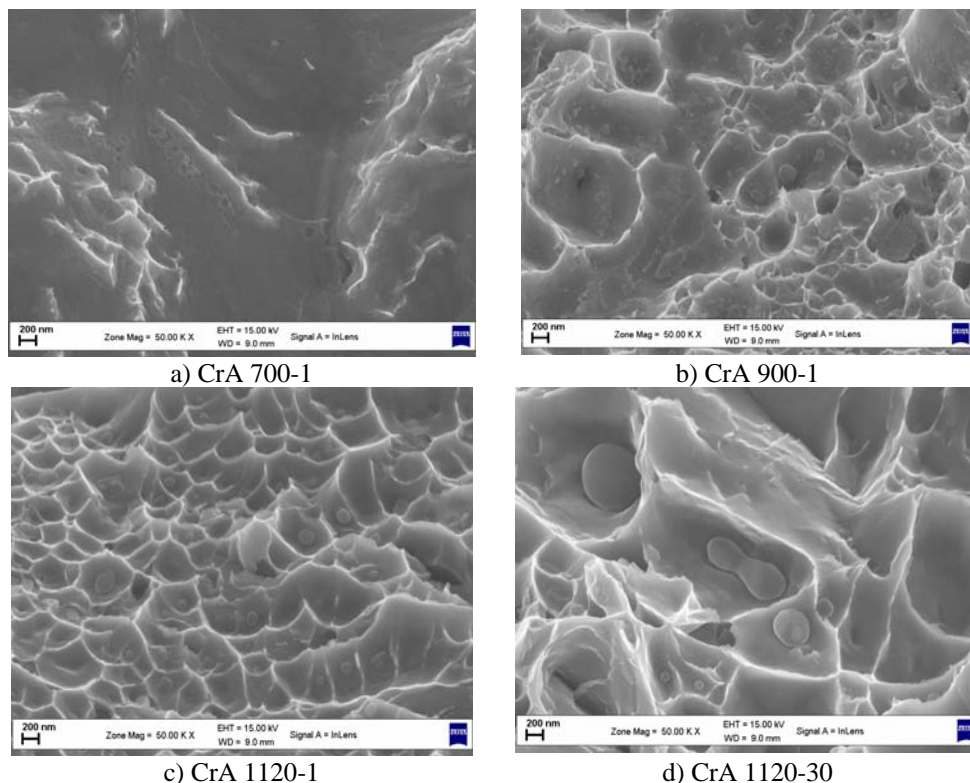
Fracture surfaces of the CrA+0.5 C compacts, showing the development of inter-particle necks at different stages of heating while sintering in 90% N₂/10 %H₂ atmosphere.
